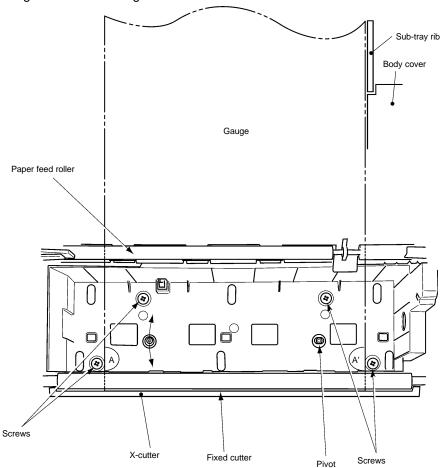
Adjusting Perpendicularity of Chassis and Document
